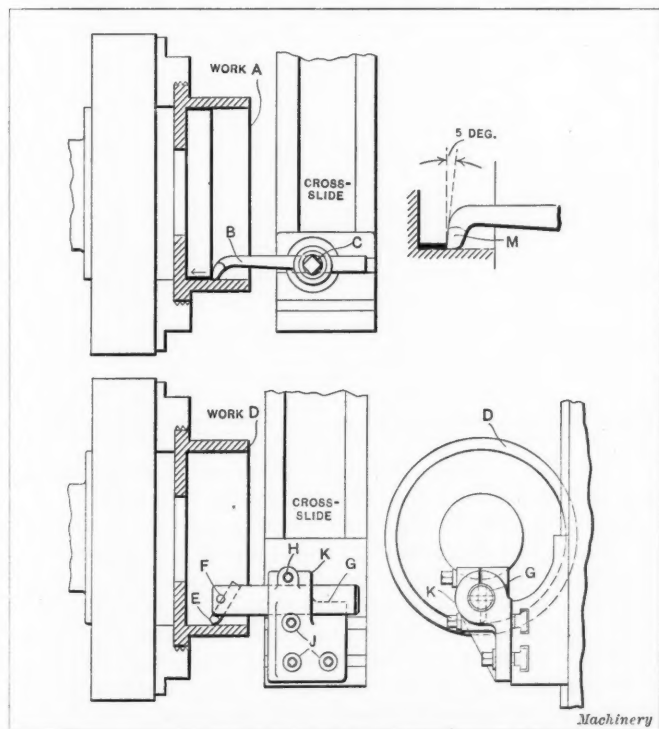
(Upper View) Forged Type of Boring Tool; (Lower View) Boring Tool with Inserted Cutter
